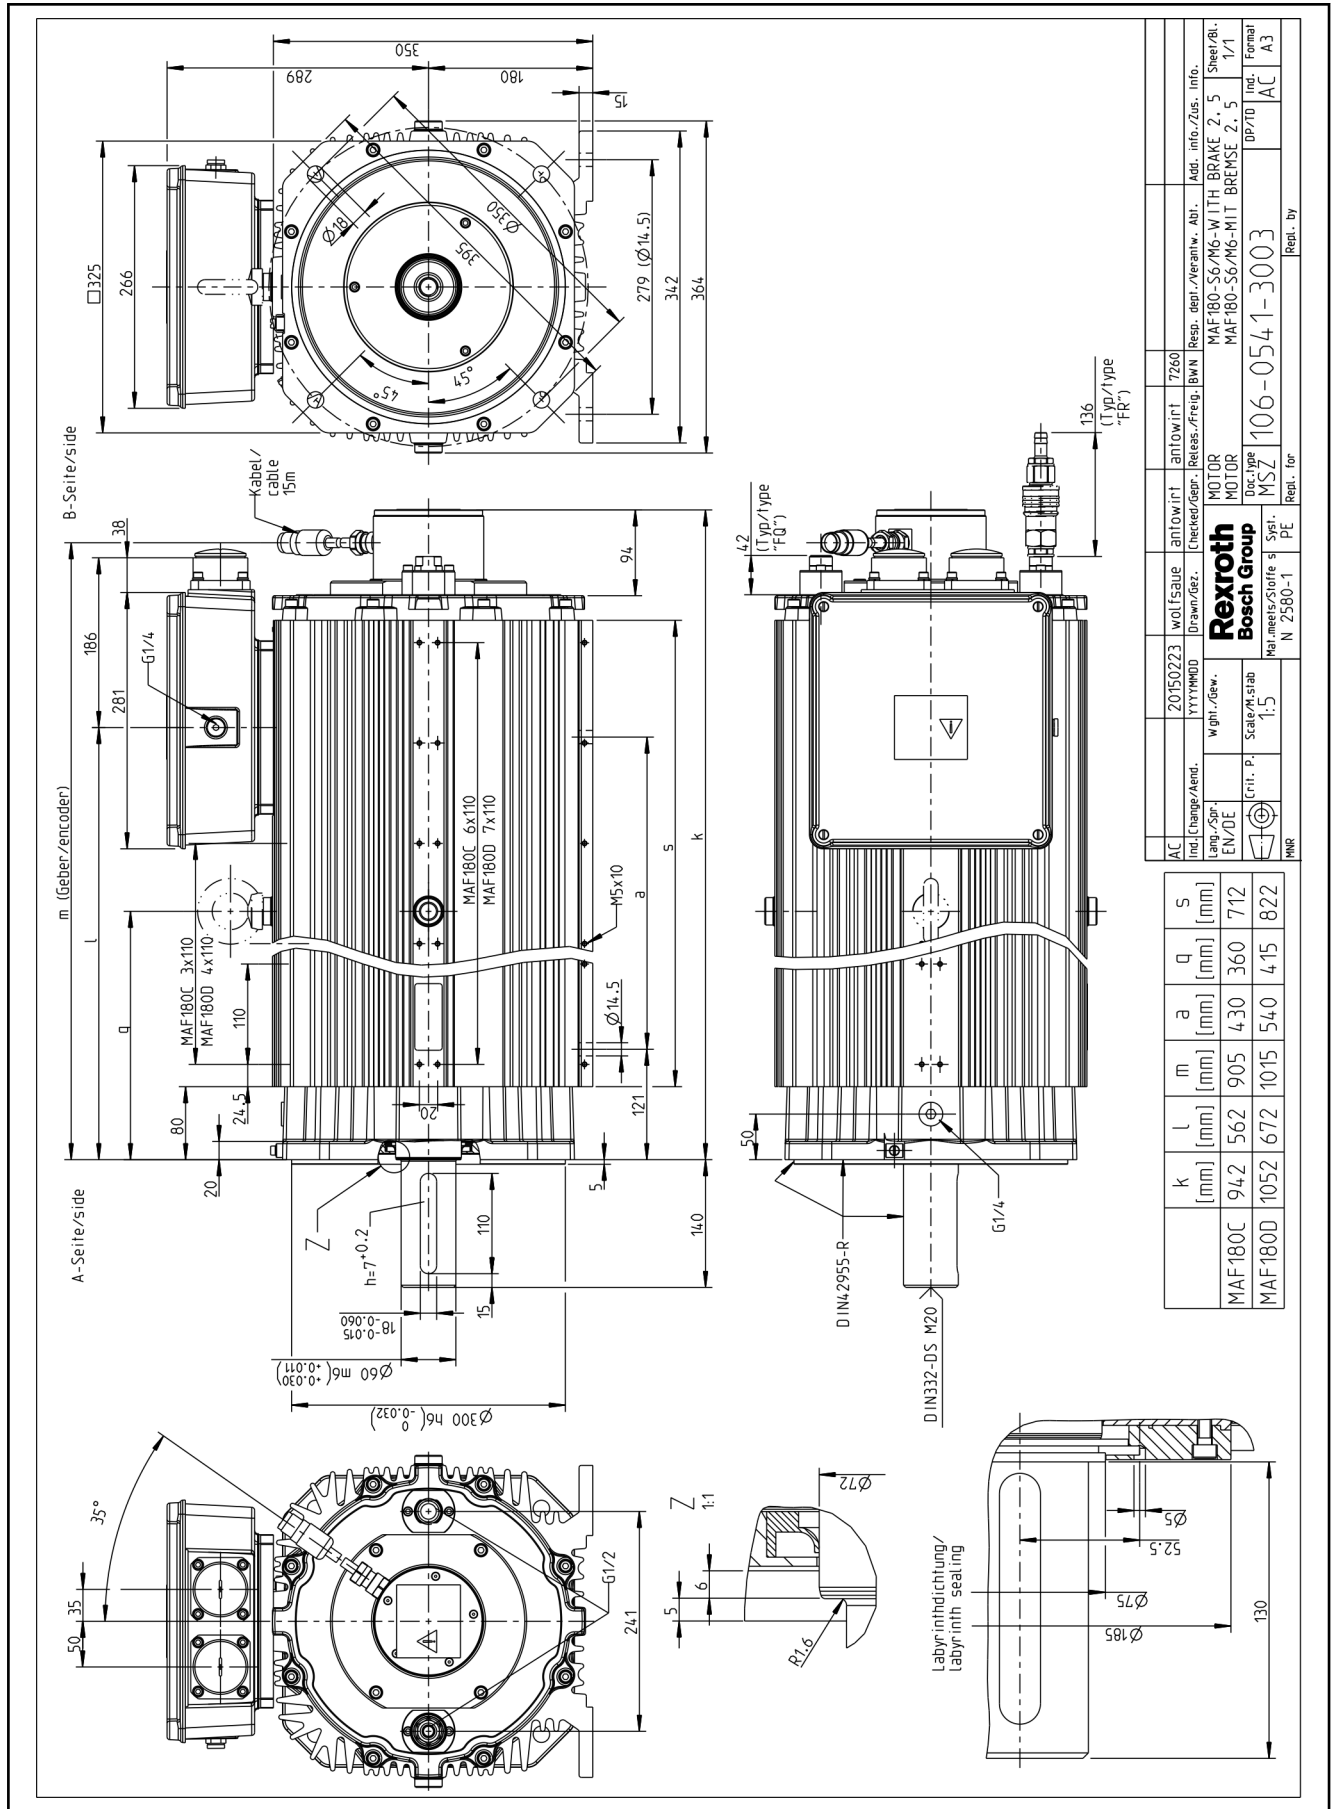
MAF180 with M6/S6 encoder, brake 2/5
